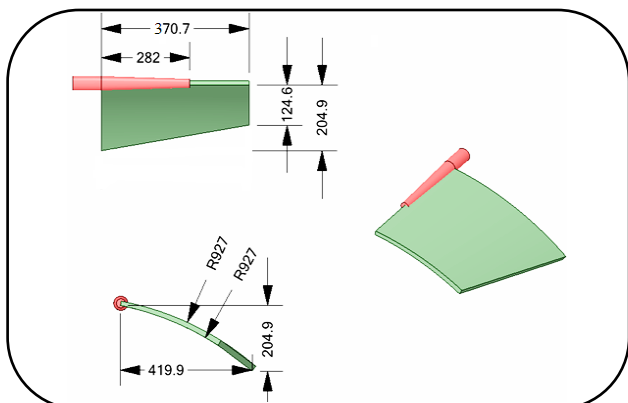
Geometric details of curved impeller blade for design C (dimensions in mm).
